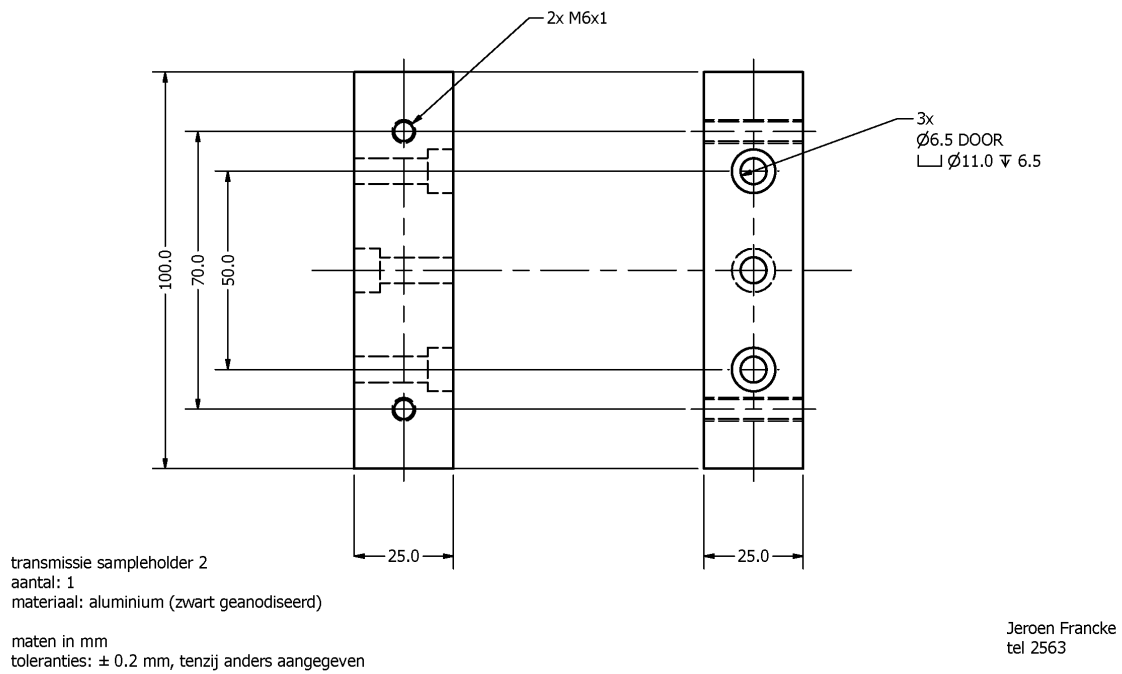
Side view of the transmission sample holder used in the optical measurements presented in this work. Sizes shown are given in mm. Drawing courtesy of ing. Jeroen Francke
